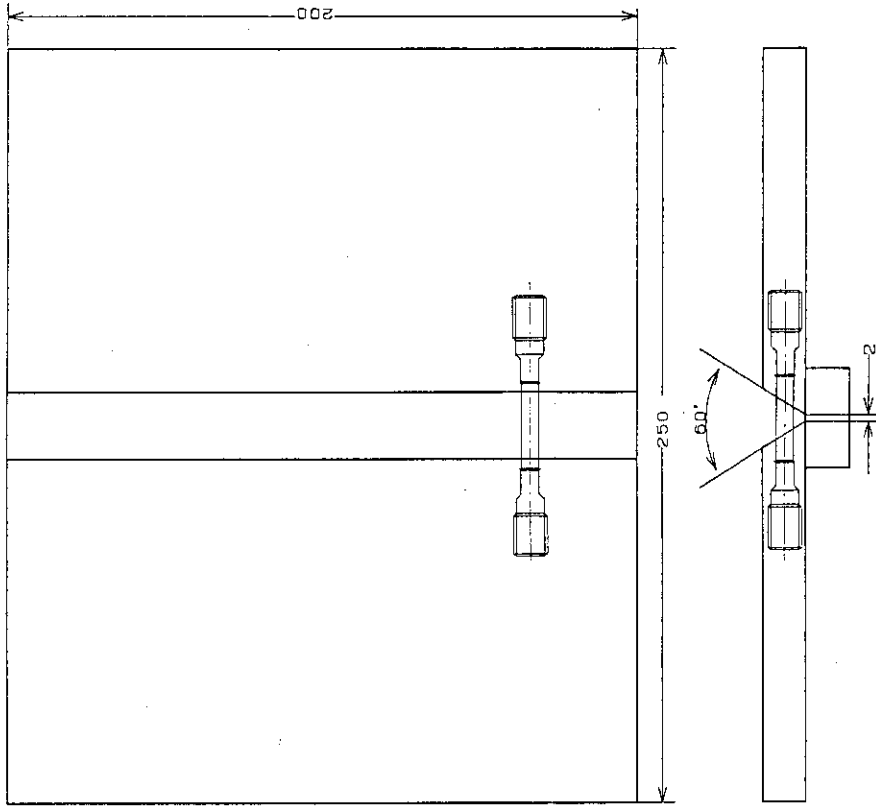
Groove geometry and method of sampling for welded joint specimen
